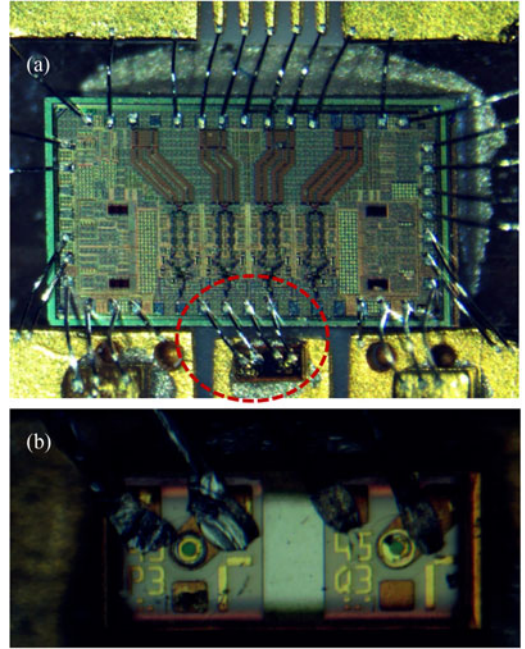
(a) Wire bond assembly including the four-channel driver, wire bond to the 1×2 VCSEL array highlighted with red circle. (b) Zoom of the wire bonded VCSEL array.
